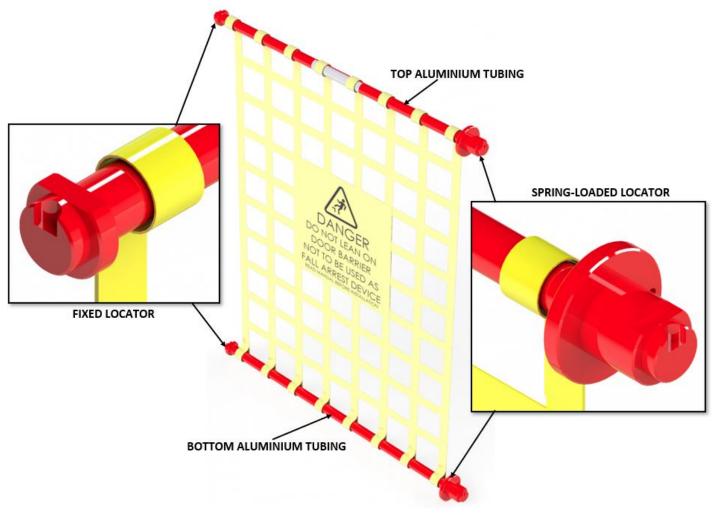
239CA29, 241CA29, & 242CA39 Removal.
